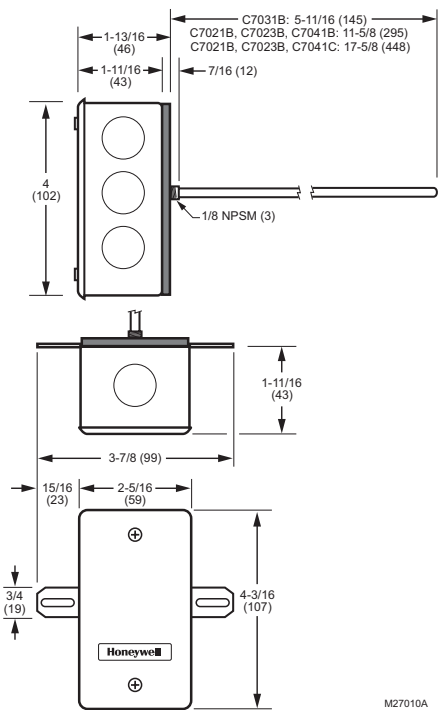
C7021B/C, C7023B/C Dimensions in Inches (mm).
